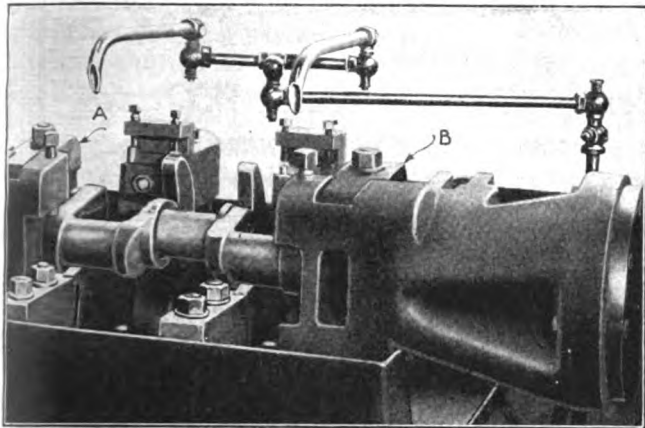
TURNING PIN BEARINGS ON LEBLOND LATHE
